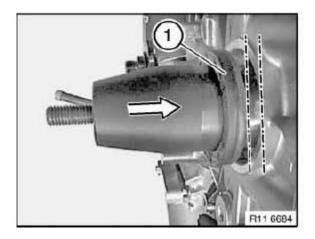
Pushing Radial Shaft Seal Courtesy of BMW OF NORTH AMERICA, INC.
